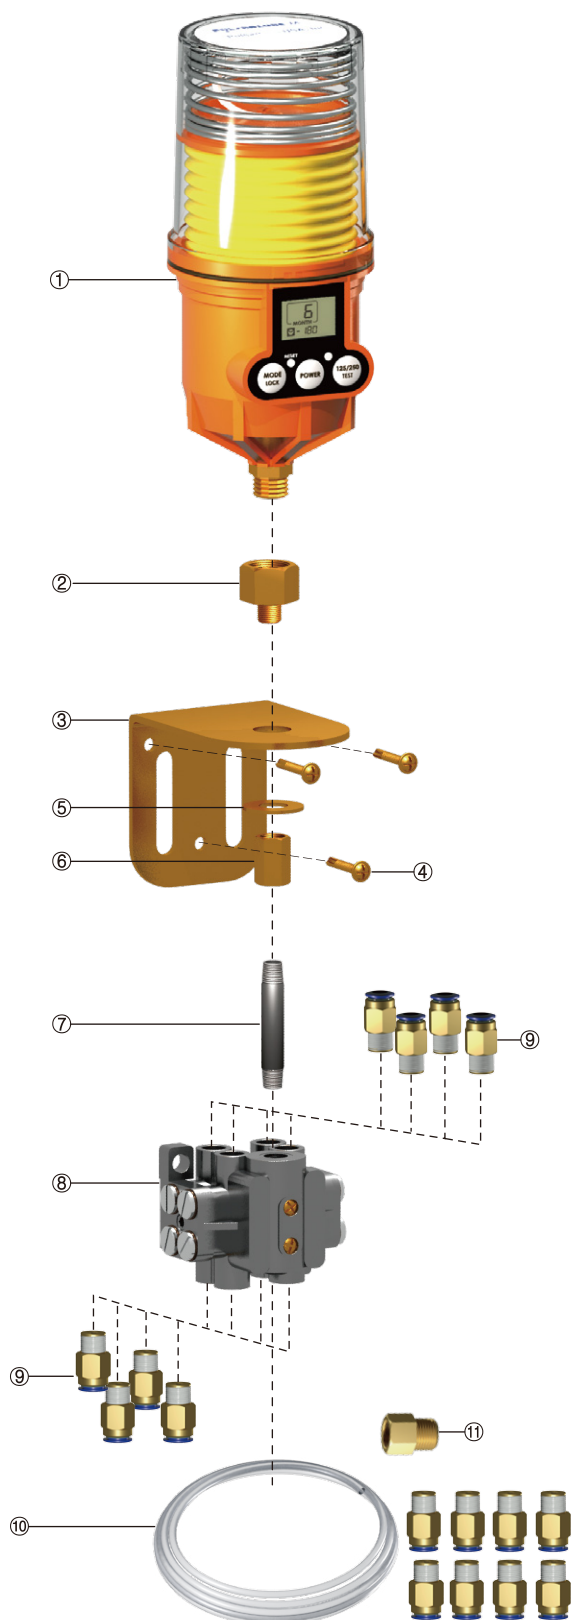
DETAILED KIT PARTS AND ASSEMBLY PROCEDURE
